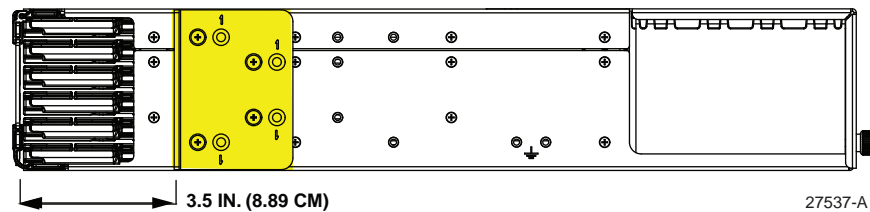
Rack Mounting Position for 3.5-Inch Recess
